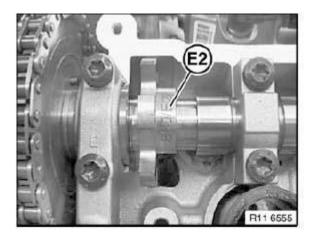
Identifying Designation (E2) On Dihedron Courtesy of BMW OF NORTH AMERICA, INC.
